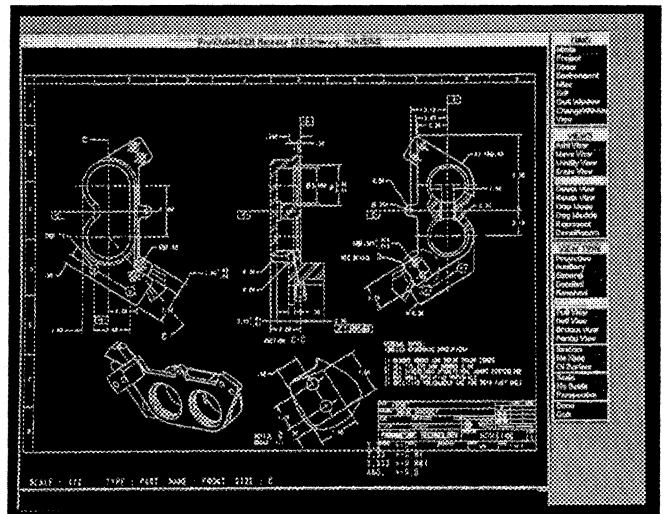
Detail Drawing Created with Pro/DETAIL
